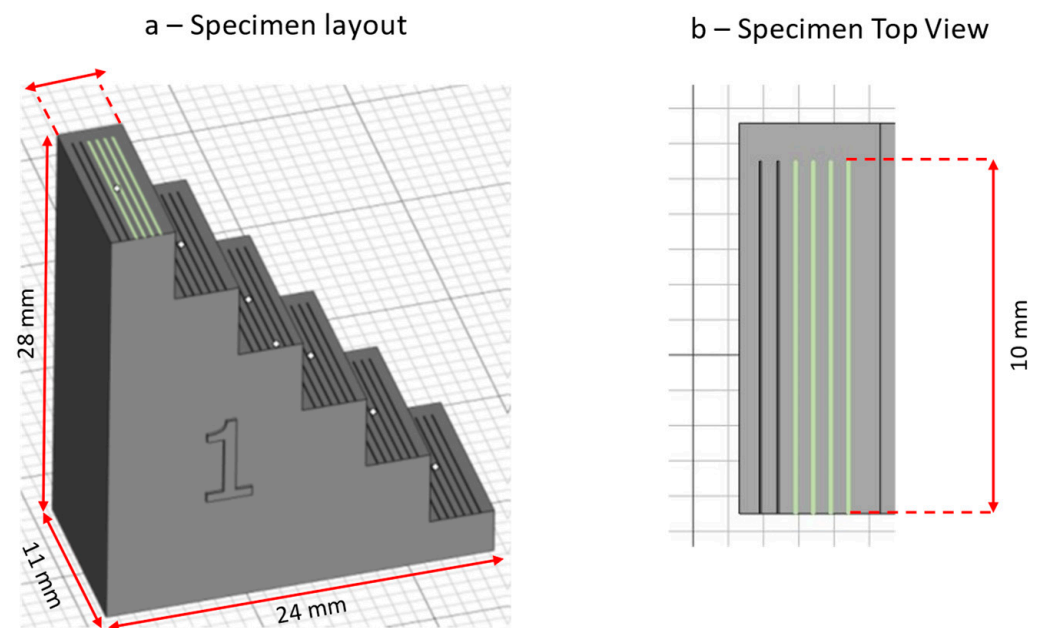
(a) Specimen layout and dimensions; (b) Single Track dimensions on the top surface of the specimen.
